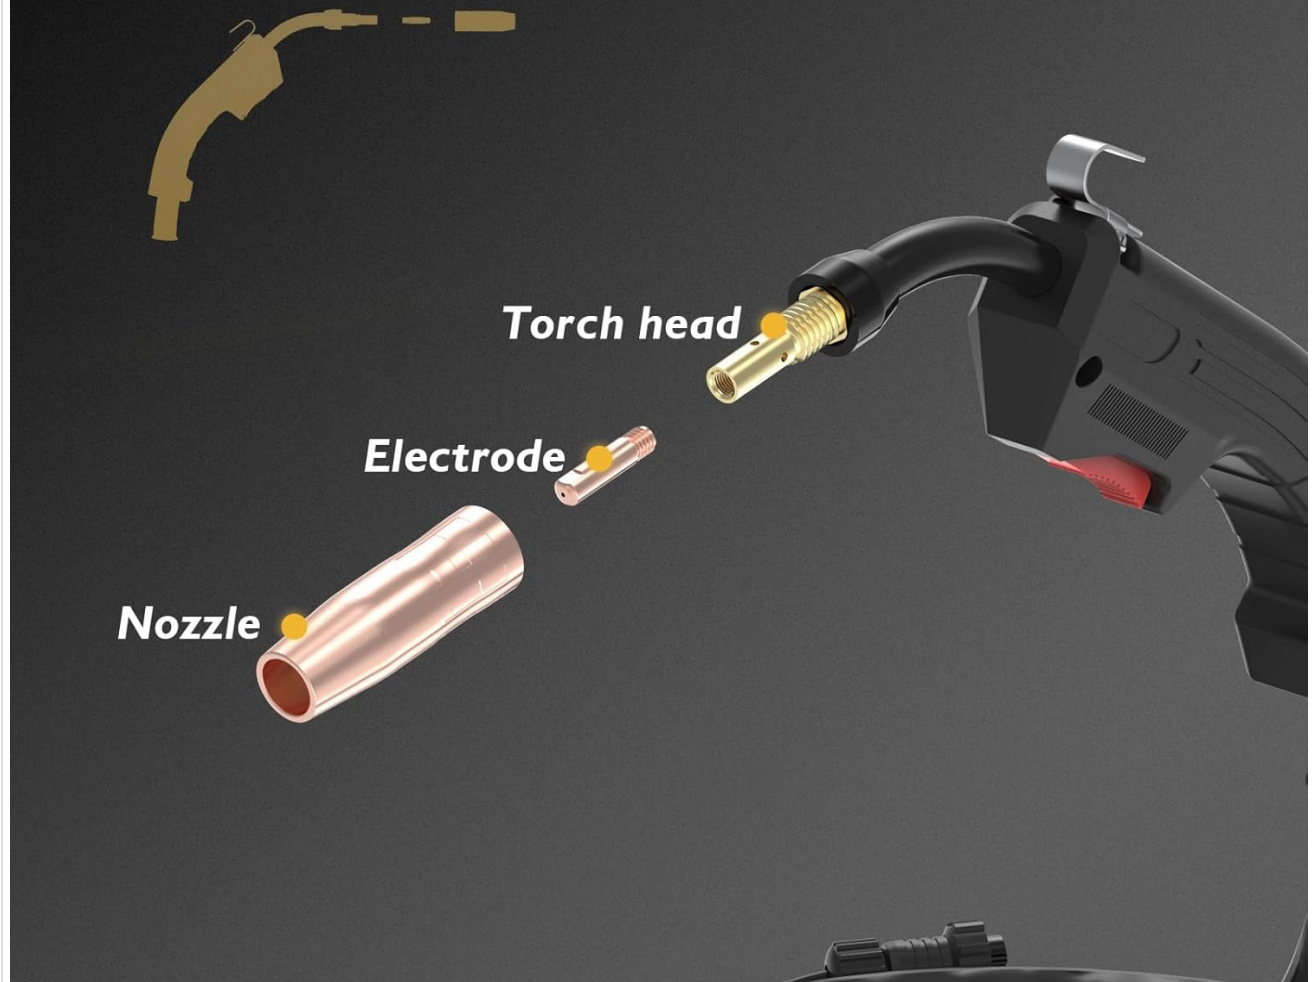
Key components of the MIG welding gun: Nozzle, Electrode (Contact Tip), and Torch Head.
